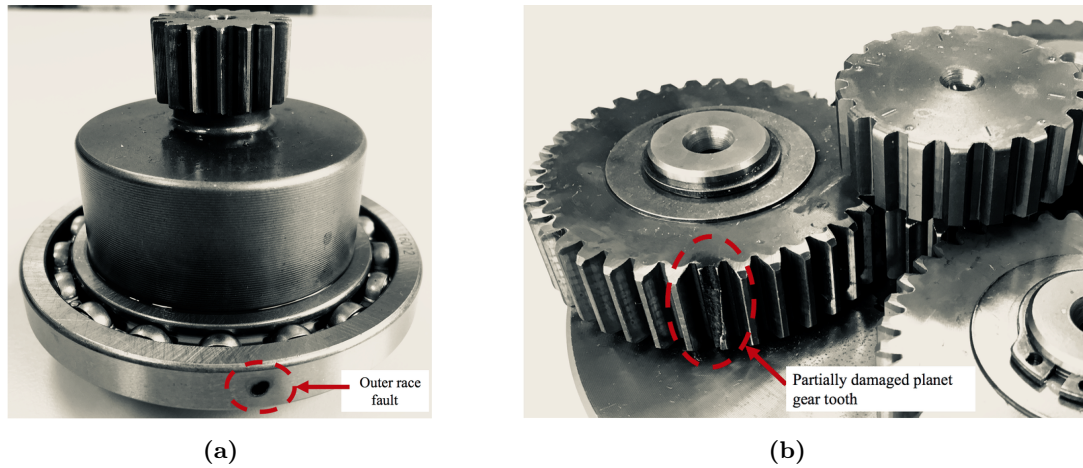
Shows the artificially seeded fault in (a) the bearing and (b) the planet gear [44].
